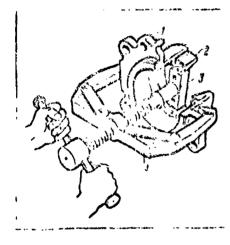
Pressing the outer bearing races of the spindle pinion gear shaft out of the carrier with a 20P-7968 pullor: 1) bearing carrier 2) bearing outer
